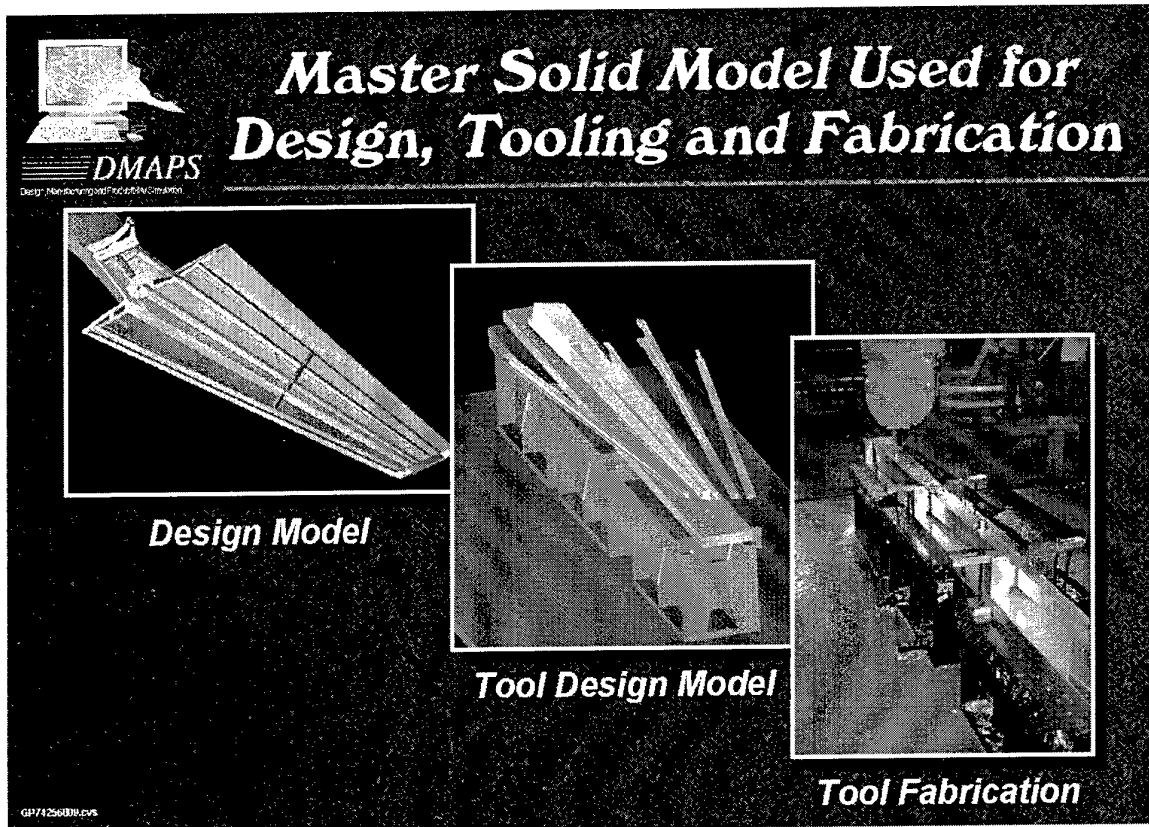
"Master Solid Model Used for Design, Tooling and Fabrication"
